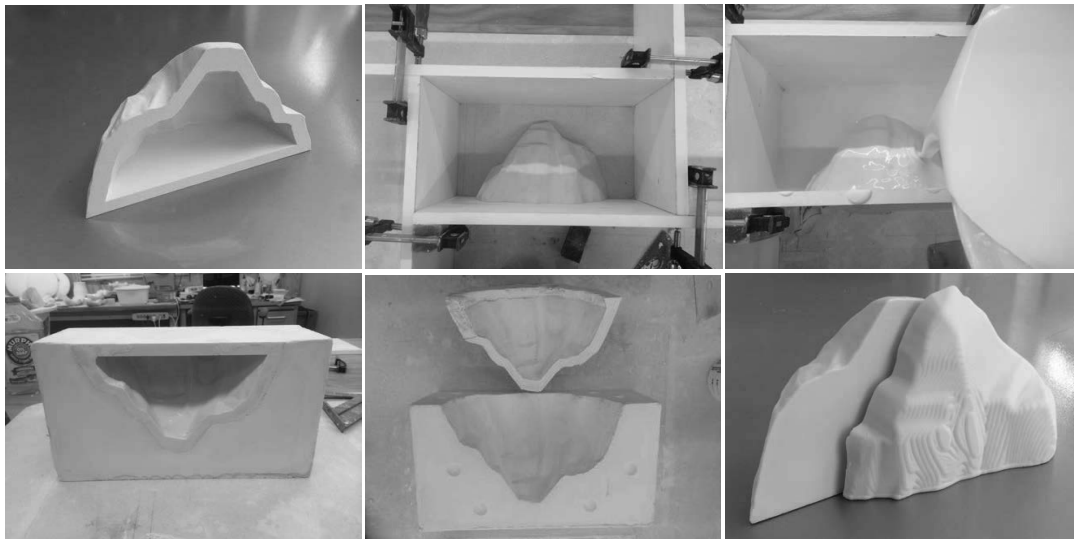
Images of 3D printing prototyping, mould making and porcelain mountain
